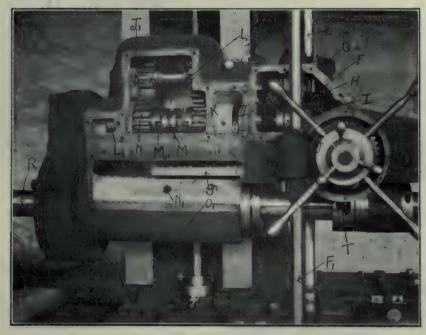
Power Transmission, Universal Horizontal Boring Machine.
